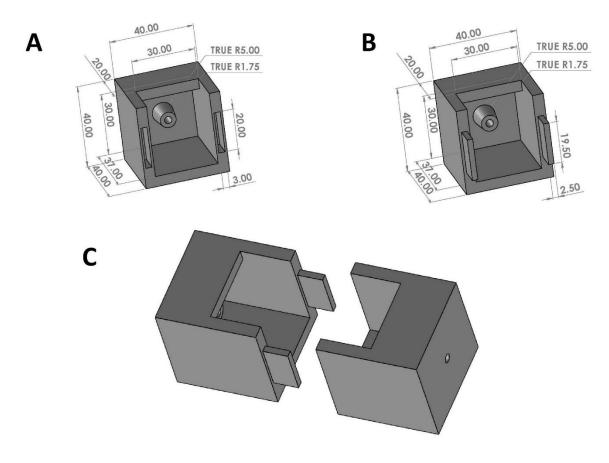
Plastic Holder Design. The plastic holder design is split into two meshing parts; (A) female and (B) male. Their assembly is shown in (C).
